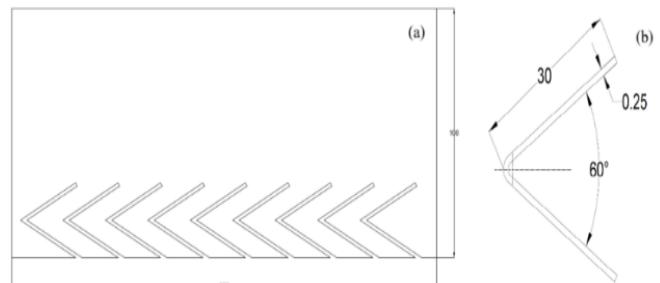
(a) Machined Nimonic alloy 75 sheet (b) Detailed view of machined slot
